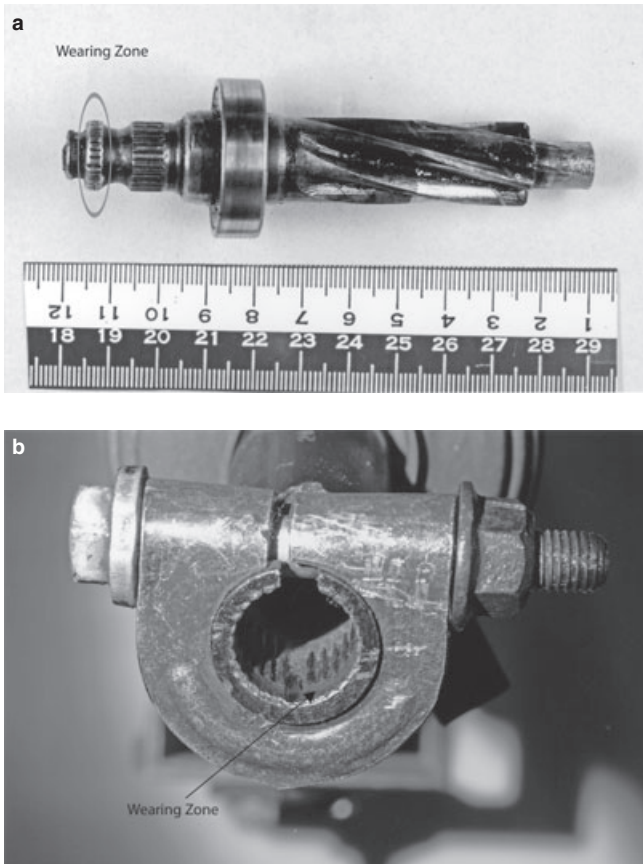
The worn parts: (a) Pinion shaft—transfers movement from the steering wheel to the steering rack. Also, it shows the worn teeth on the left edge. (b) Clamp—links the steering wheel with the pinion.
